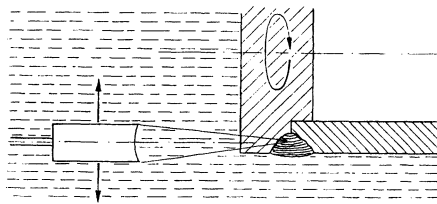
Testing the joint of a sealing cap according to Crowe [277]
